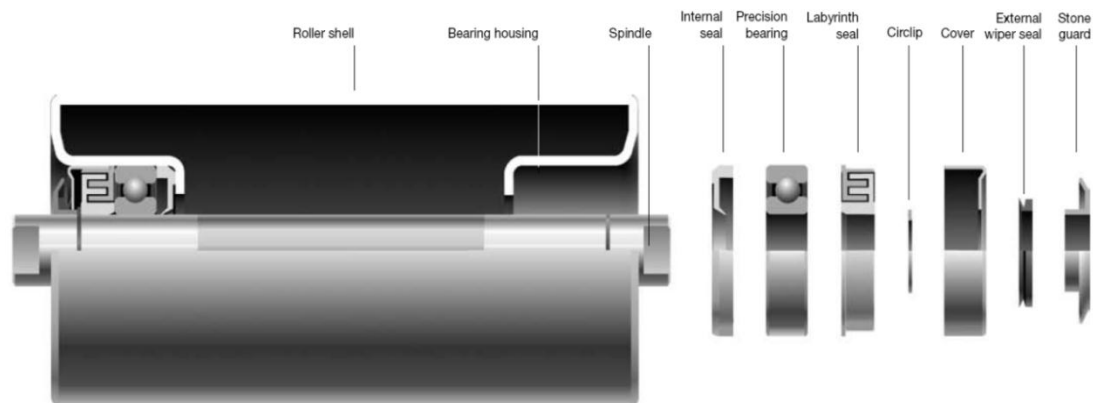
Rulmeca PSV idler exploded view (Rulmeca 2012)
